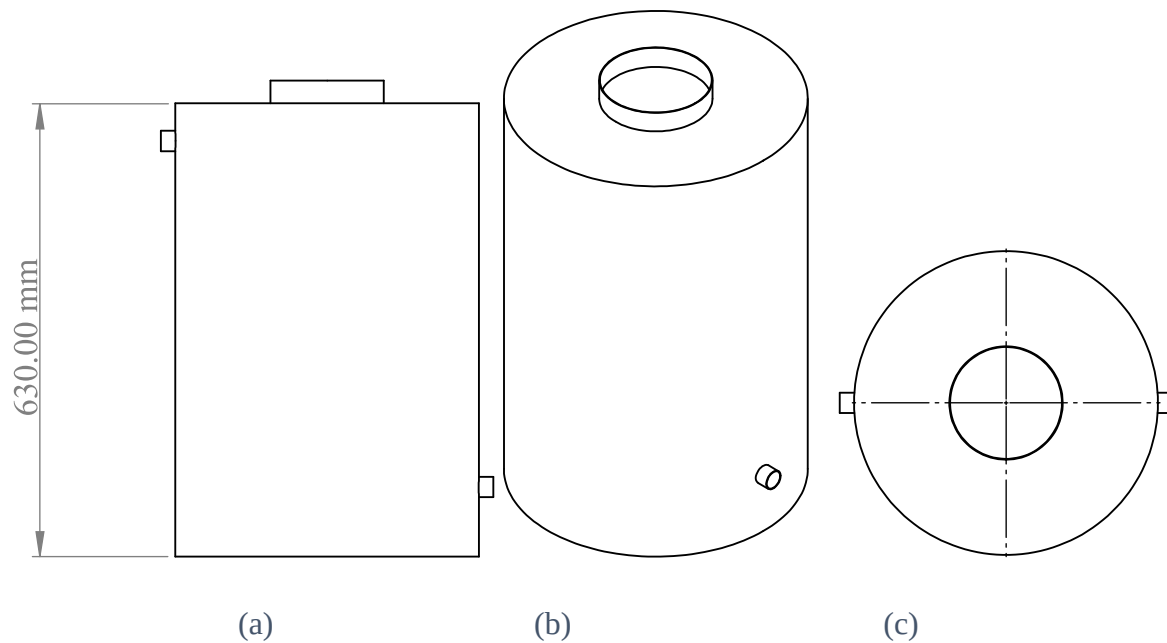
Water tanker (a) side view (b) 3D of frame (c) top view of tanker
